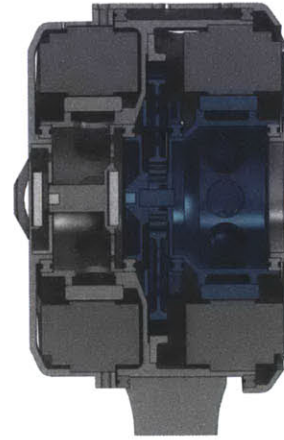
The elbow motor actuates the tricep, a steel linkage that is connected to a protrusion of the radius behind the elbow joint. Components that move when the elbow motor is actuated are highlighted in blue.
